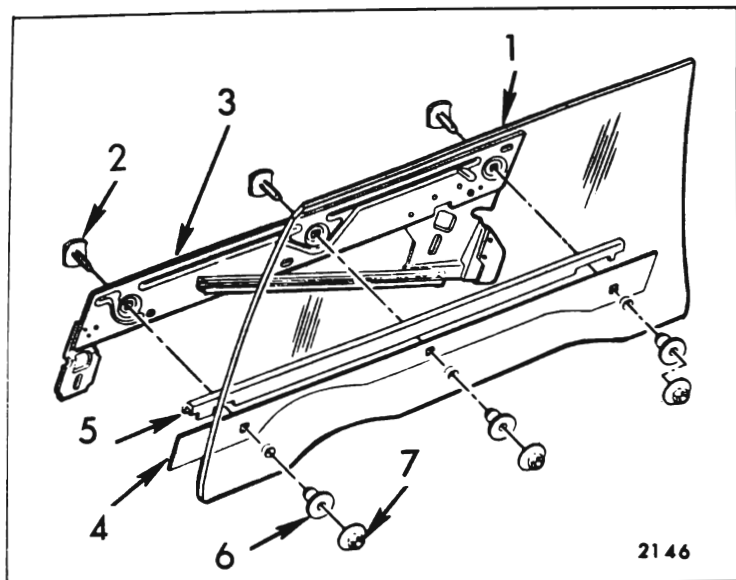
Front Door Window Assembly - All "37-39-47-57 and 67" and "C-69" Styles
